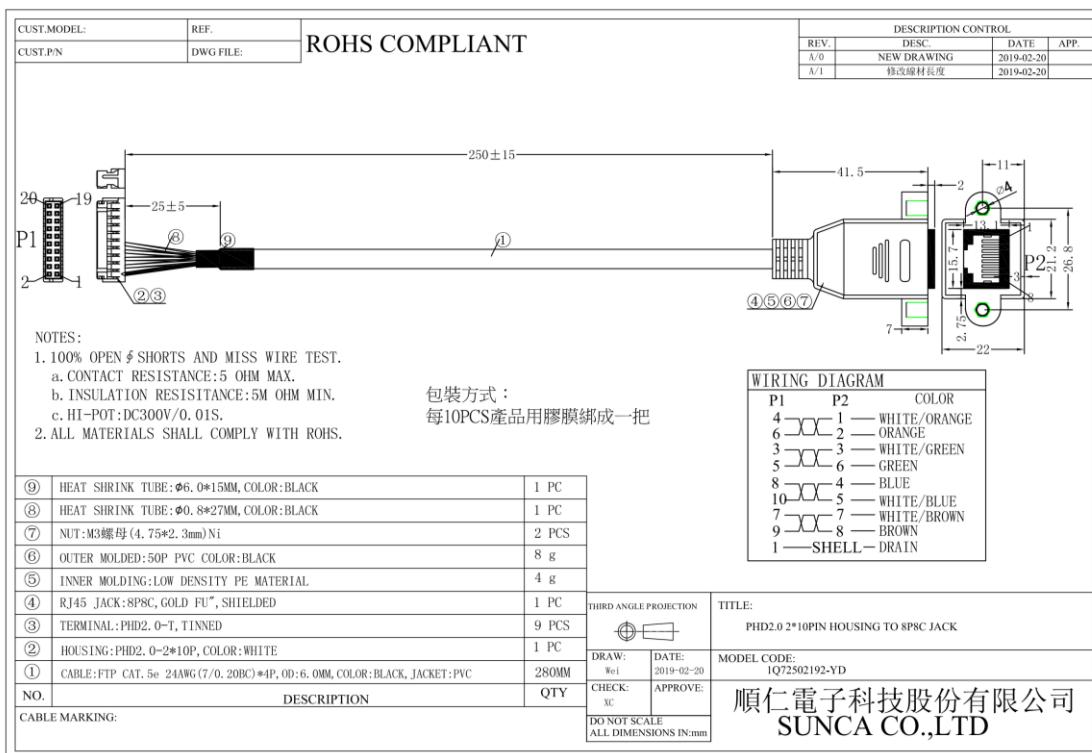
20pin Pitch 2.0 Connector to 1 RJ45 Cable Drawing
